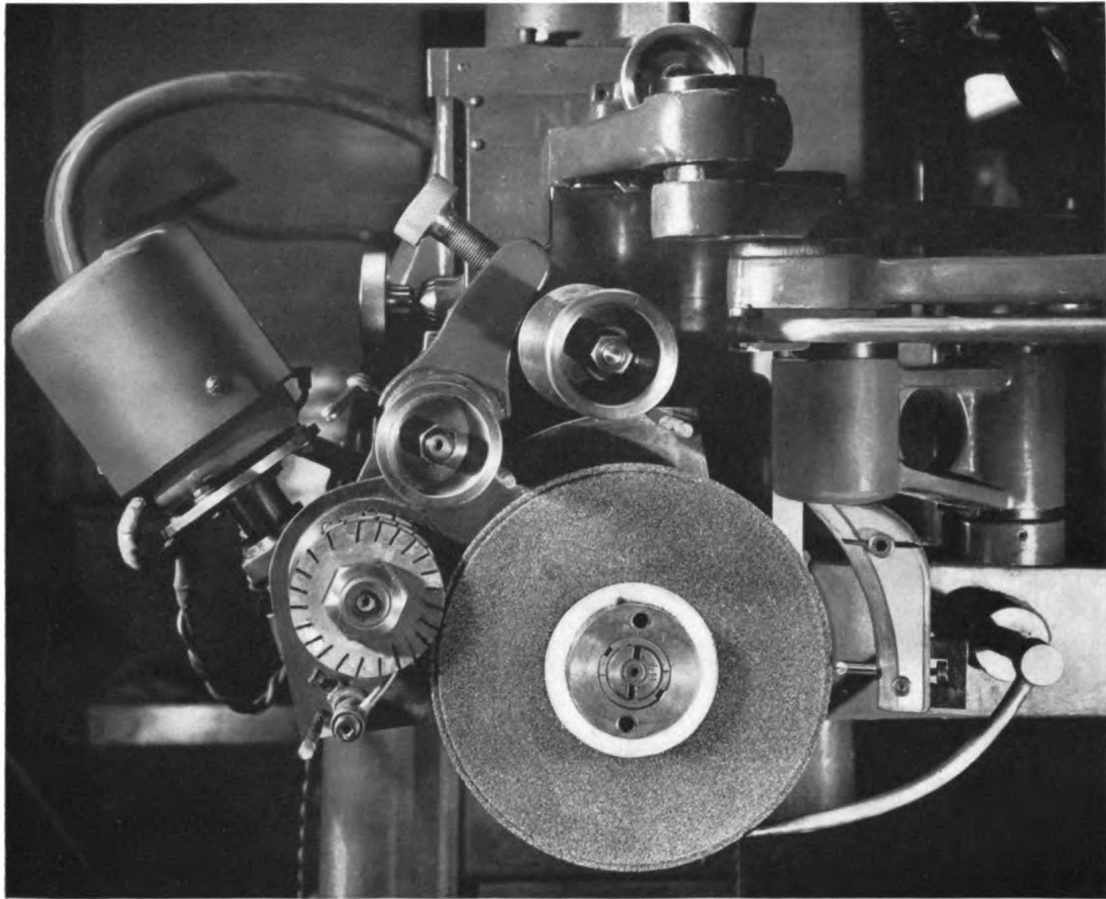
Form transferred from crusher roll to grinding wheel by slow, mutual rotation under contact pressure.
